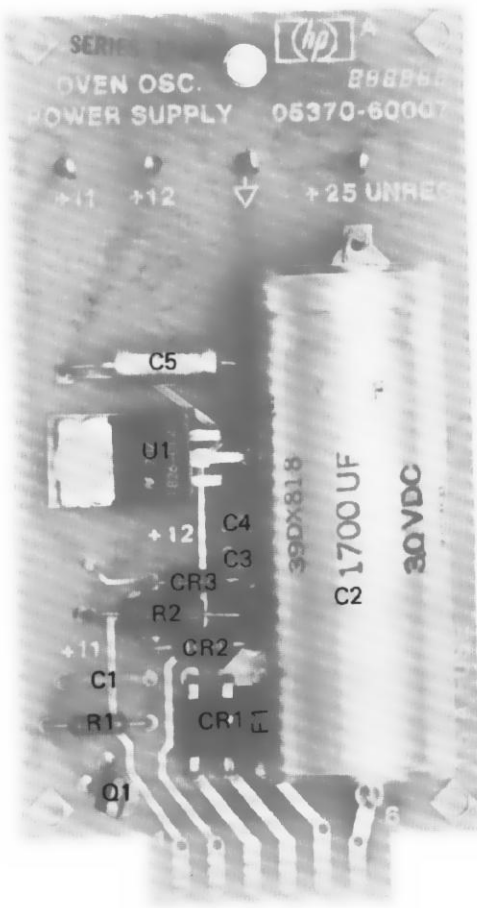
A7 Oven Oscillator Power Supply Assembly
